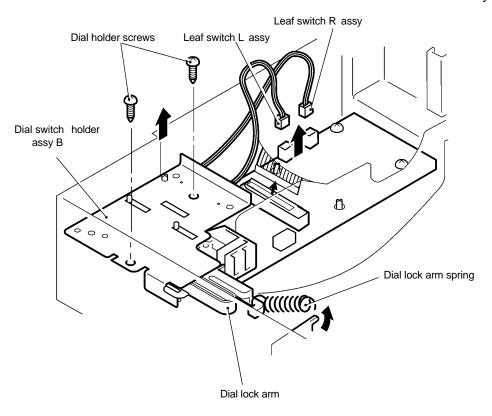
Removing the Dial Switch Holder Assy B
